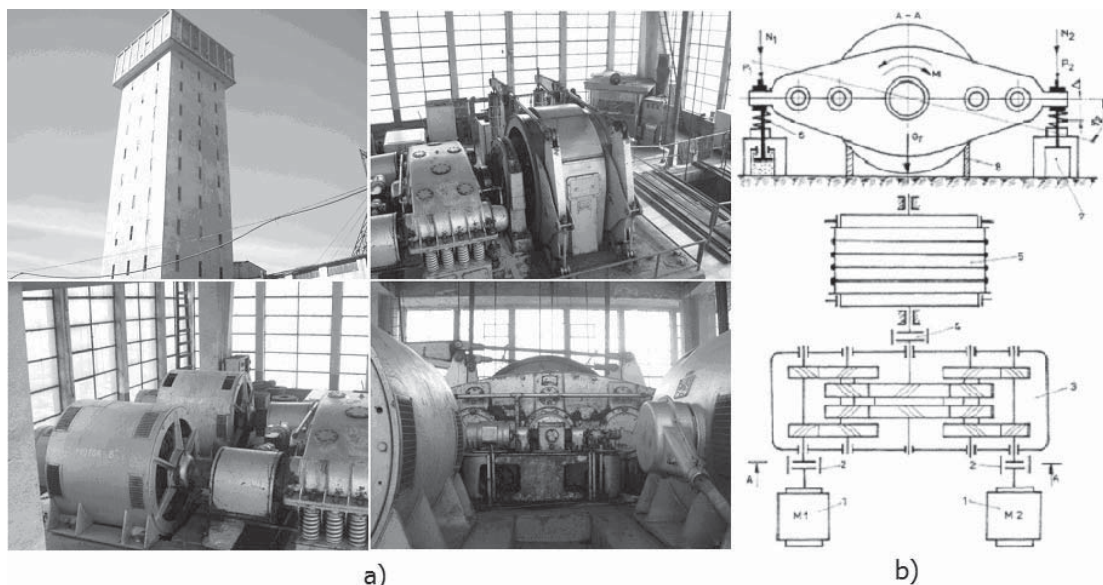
MK 2,1x4 winding machine in old Shaft with skip and kinematic diagram
